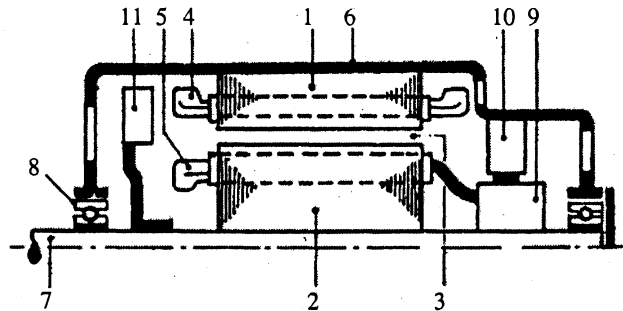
Rotating machines-constructural elements, 1-stator core, 2-rotor core, 3-gap, 4-stator winding, 5-rotor winding, 6-frame, 7-shaft, 8-bearing, 9-commutator, 10-brush and brush-gear, 11-fan.
